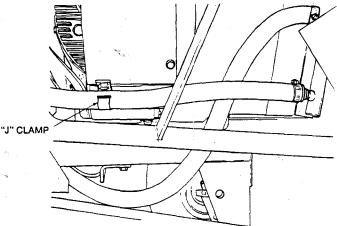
HYDRAULIC OIL LINE ROUTING AND J CLAMP
